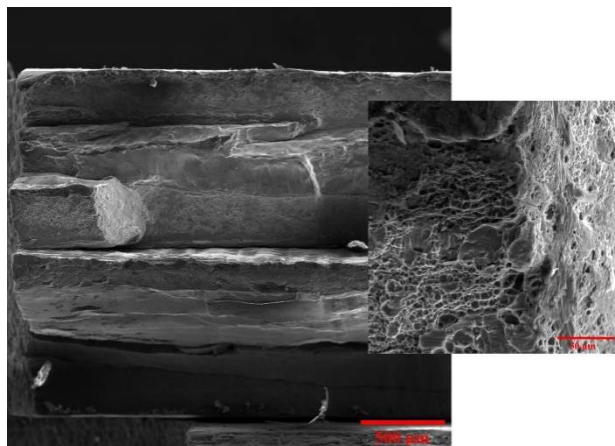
Tensile fracture surfaces of multi-layered Al/Mg composite Produced via CRB method
